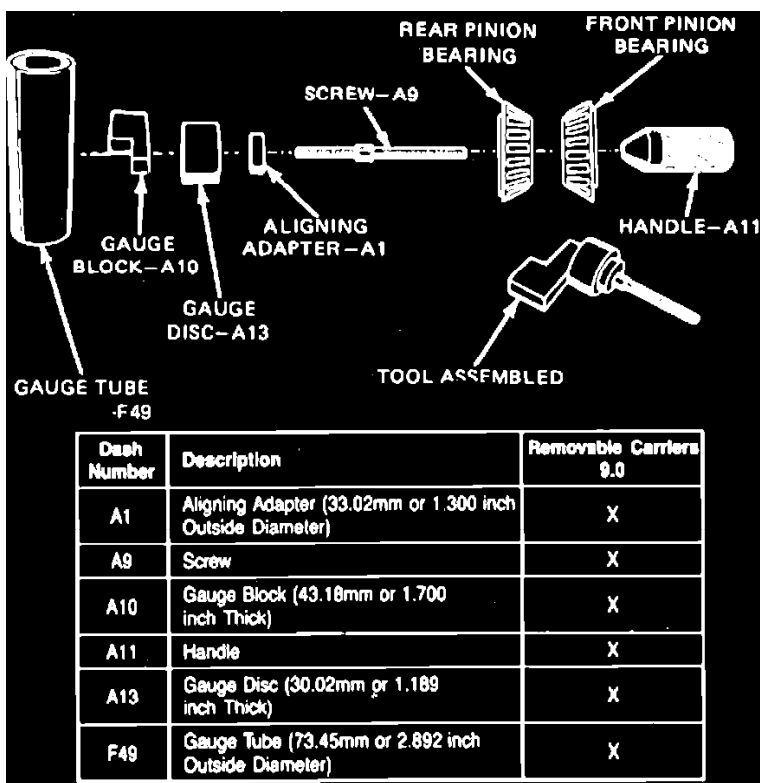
Removable carrier 9 inch ring gear axle pinion depth tool gauge
